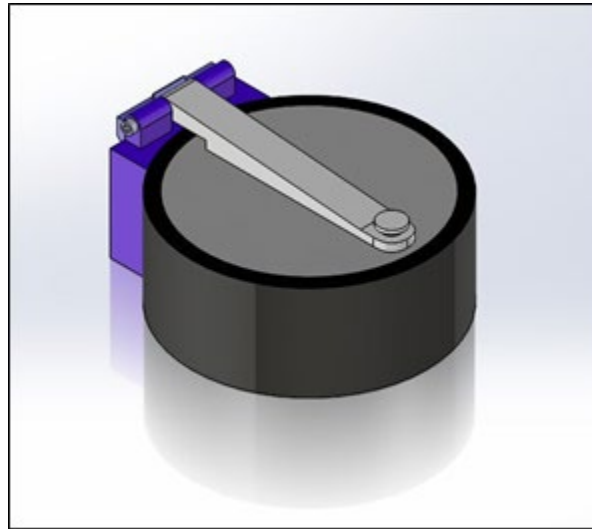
Fully assembled Fiber Optic Tamper Evident Container.
